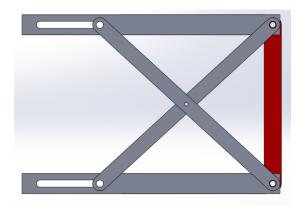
Right view of the scissor lift CAD brainstorm (open)
